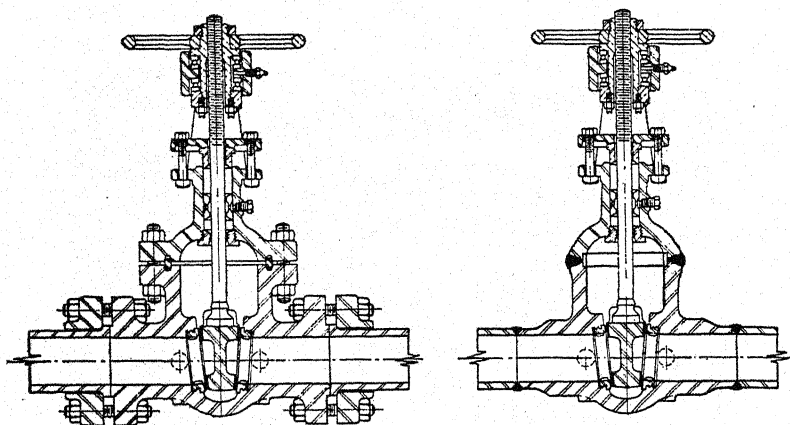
Typical cross sections of 1500-pound gate valves, comparing flanged and welded construction.
